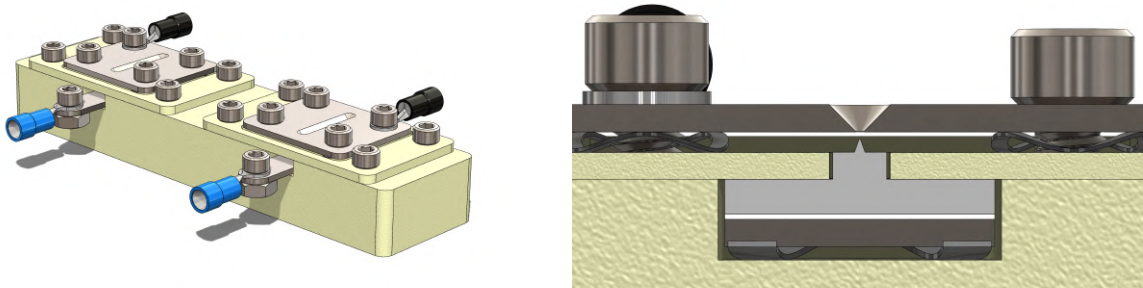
Complete VET module assembly (LHS) and magnified cross-section of the emitter apex (RHS).
